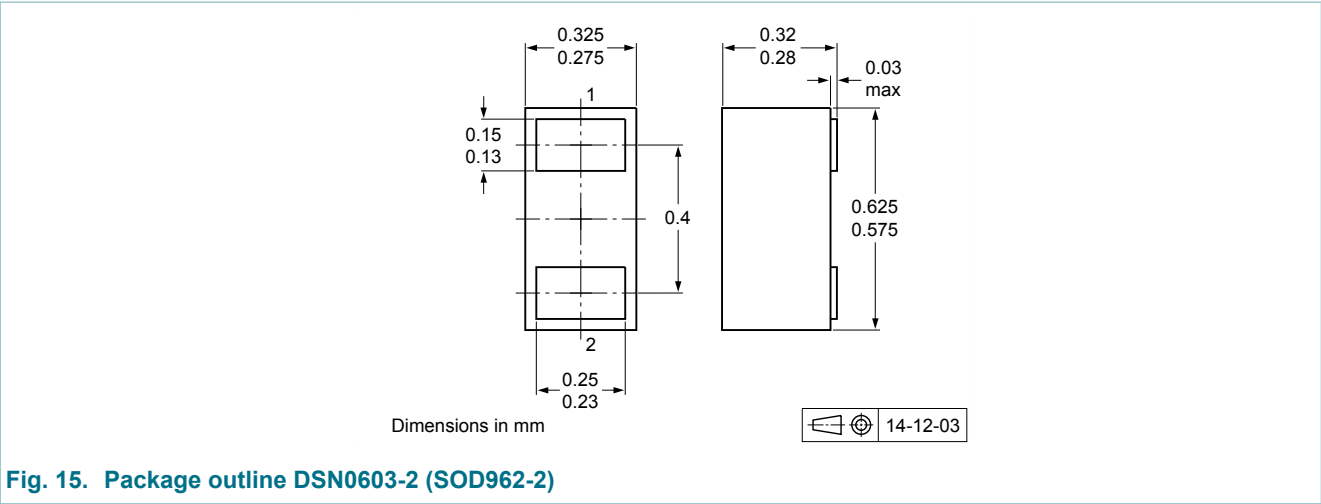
Package outline DSN0603-2 (SOD962-2)
